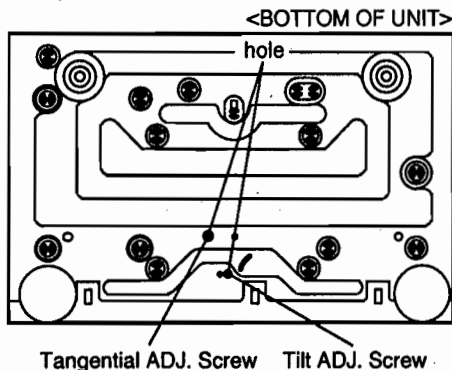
Adjustment Hole of the Bottom Plate
